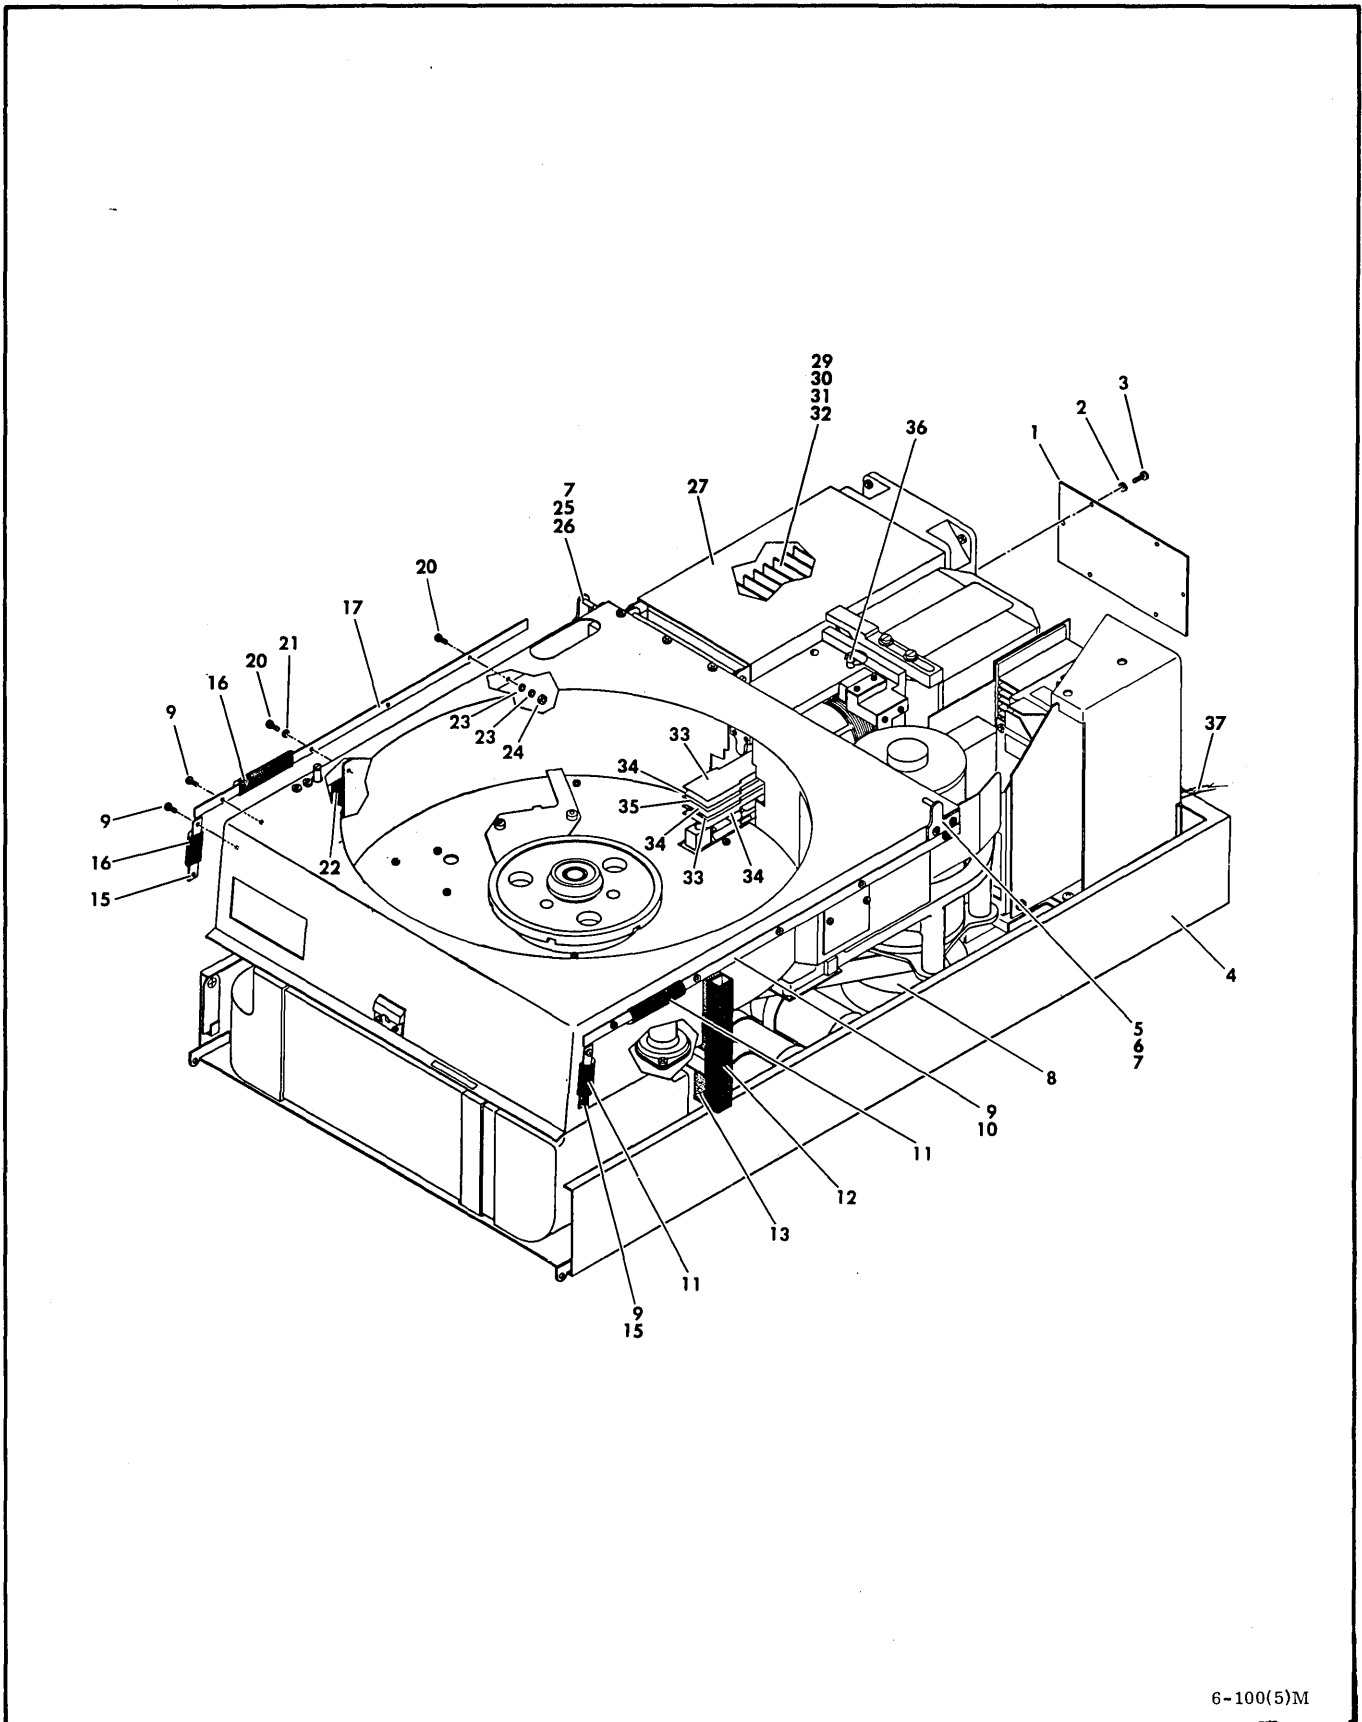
FINAL ASSEMBLY - 1X OPTION (SHEET 2)
